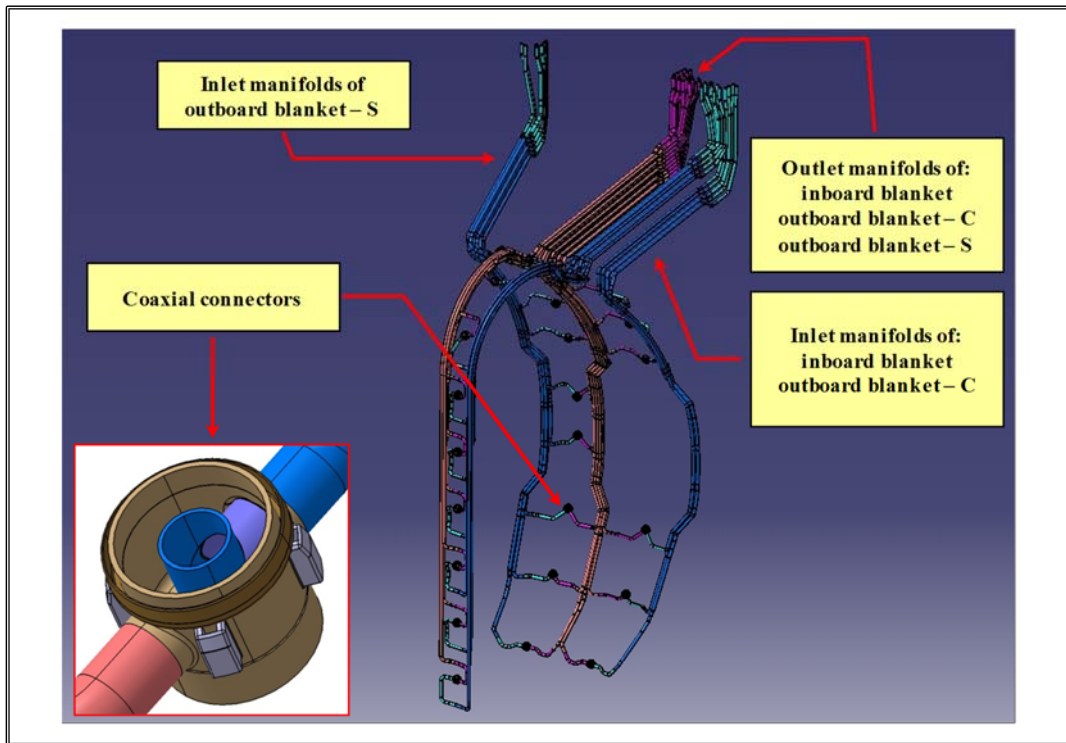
Blanket standard sector cooling system in-vessel manifolds.
